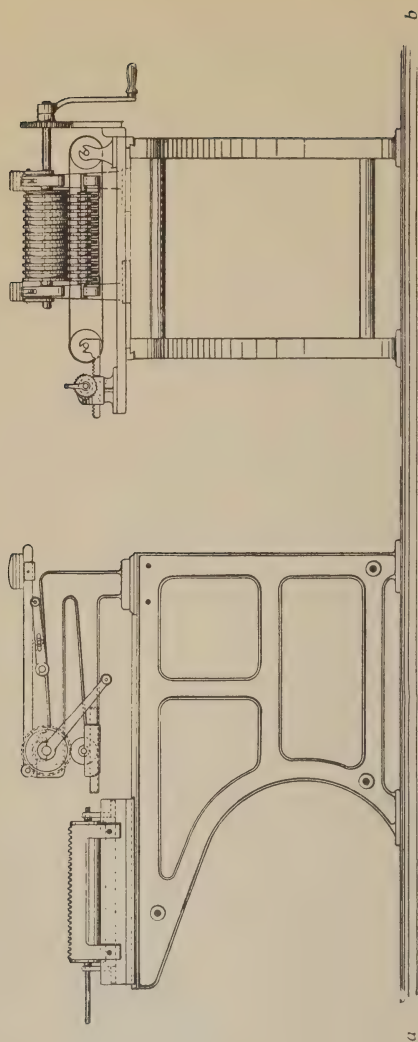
Yarn-Printing Machine for coarse One-Colour Prints and Multi-Coloured Prints.
